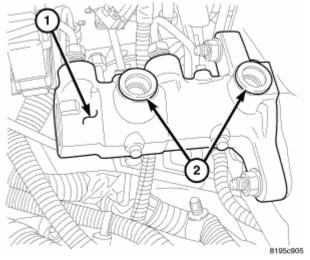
Identifying Old Grommets & Cylinder Body Courtesy of CHRYSLER LLC
